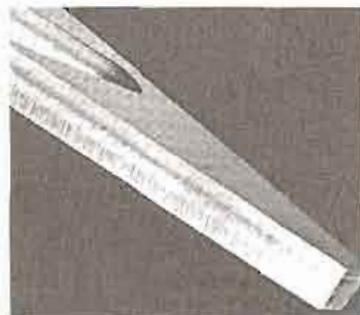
Surface of 6-mm-thick carbon steel cut with a 1250-watt laser at 1.8 m/min. (Courtesy of Coherent, Inc., Santa Clara, CA.)
